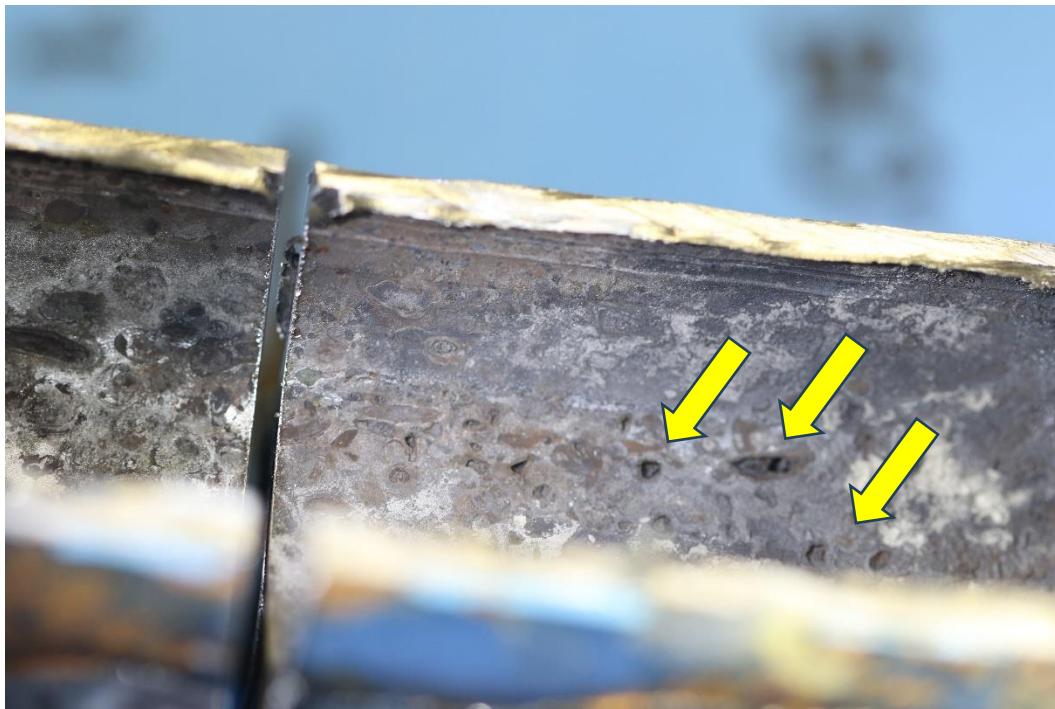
Item #1, enlarged view of pitting corrosion found inside tubing.
